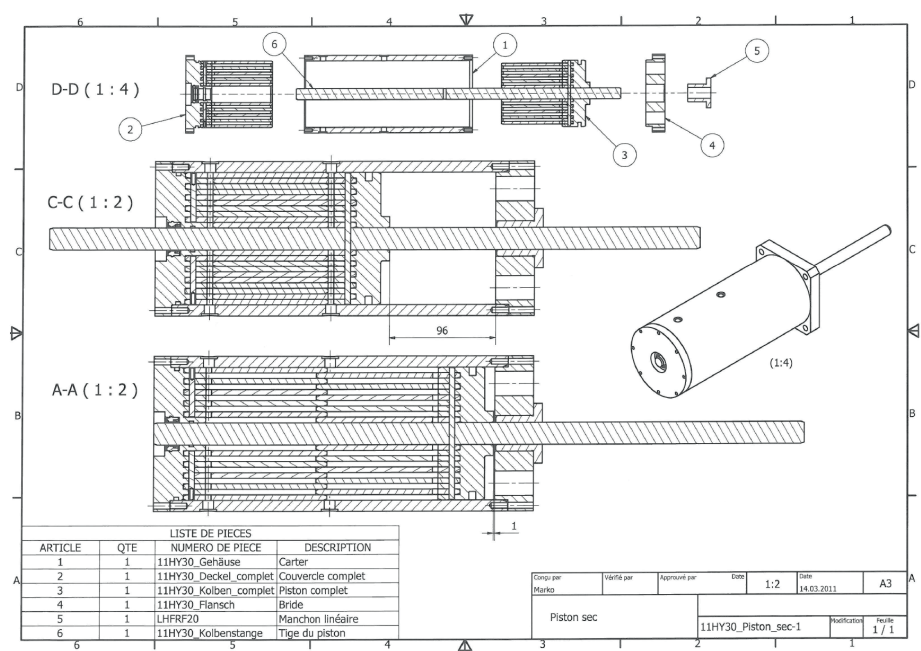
Technical drawing of the finned piston(Axial section view).
